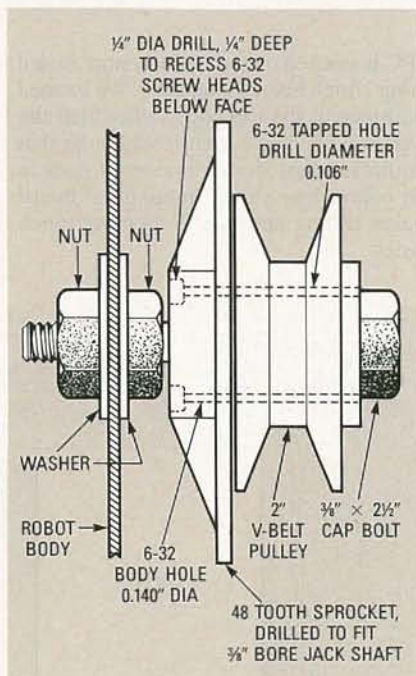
JACKSHAFT DETAILS. Be sure that the unit is assembled so that the chain and the pulley are as close as possible.
